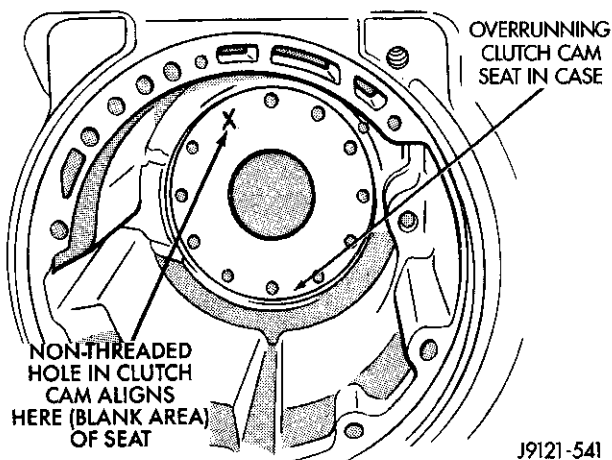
Location Of Blank Area In Clutch Cam Bolt Circle
